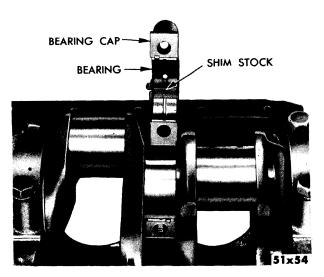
Checking Main Bearing Clearance With Shim Stock
